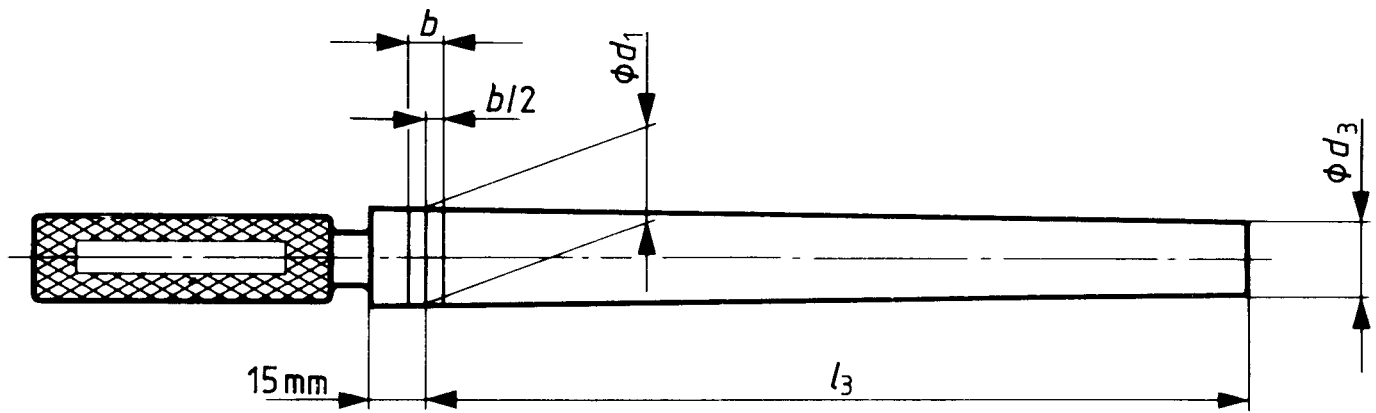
b) – Gauge with taper 1 : 38 for tubes type B
